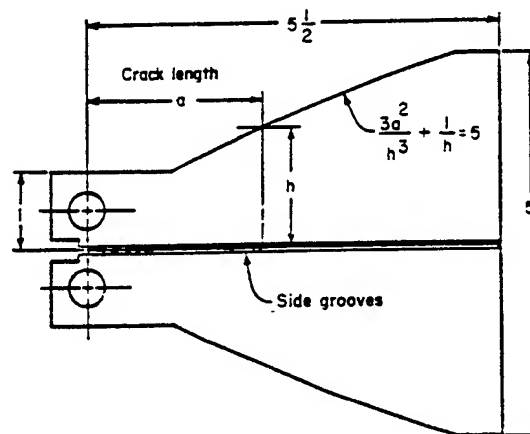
Typical Tapered Double Cantilever Beam (TDCB) Specimen with Side Grooves.
